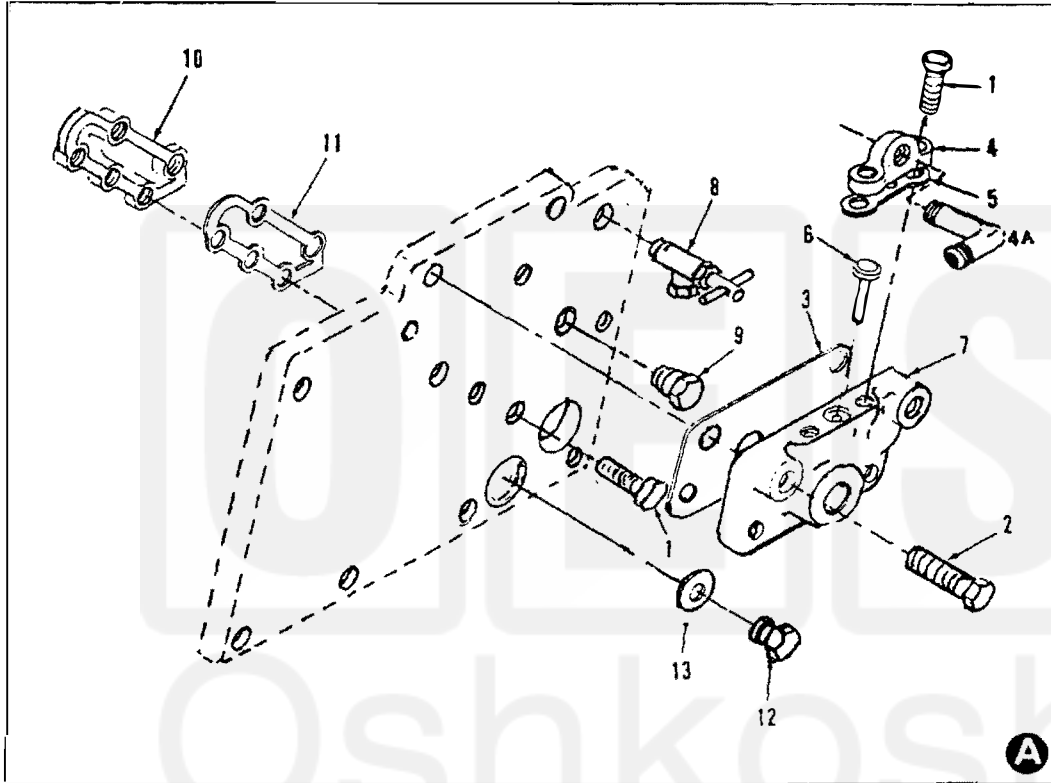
Fuel Injection Pump (Sheet 2 of 4)
